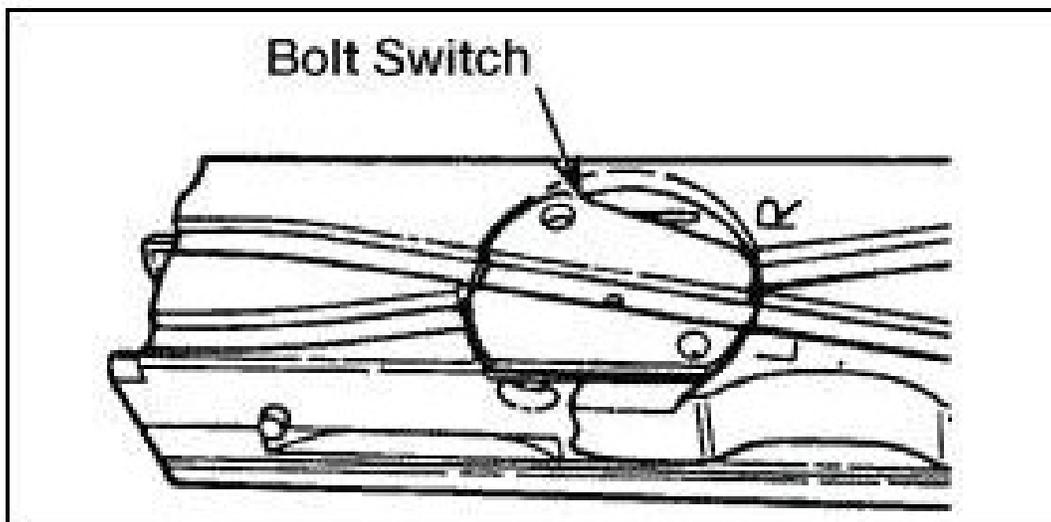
ST-1025_37 (Installation of the bolt assembly)
